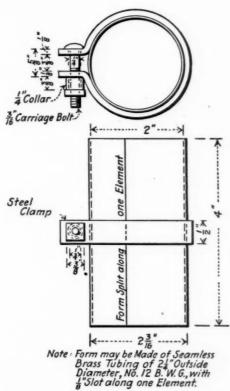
Details for 2 by 4-in. Cylinder Form.
